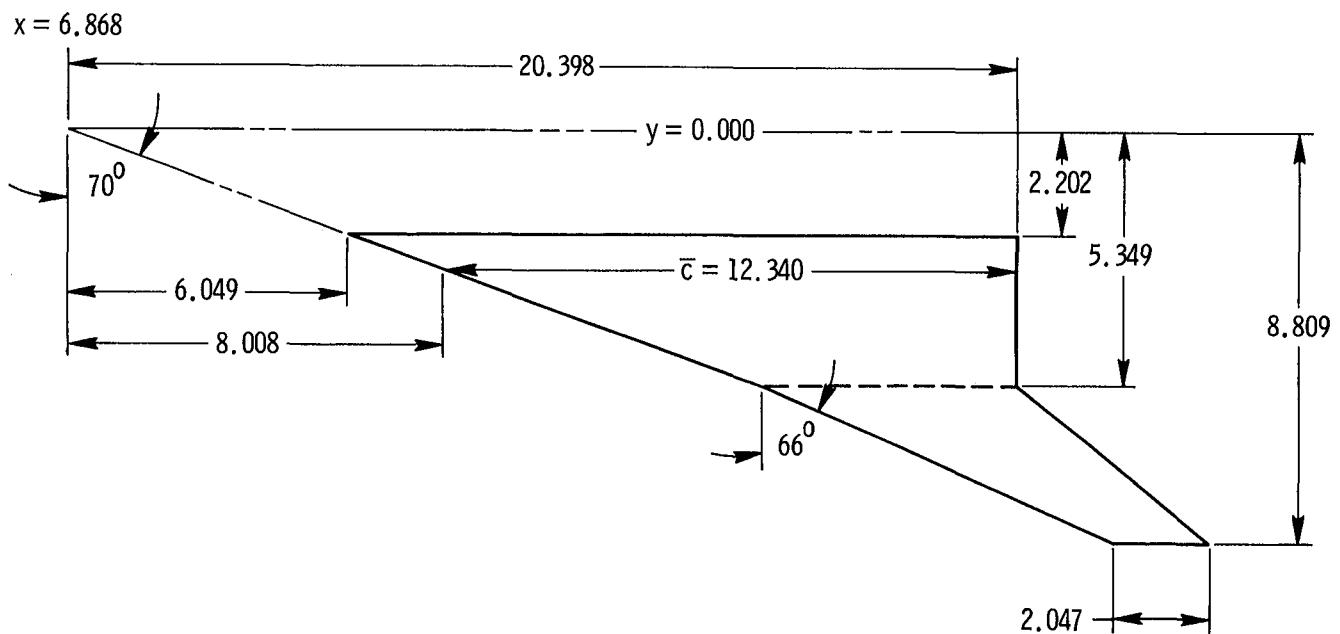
Details of 70°/66° cranked wing. Linear dimensions are in inches.
